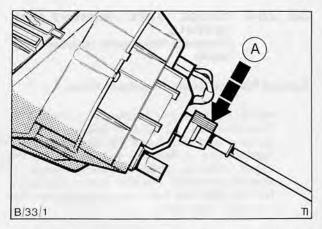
Disconnect speedo by depressing grooved section in direction of arrow 'A'
